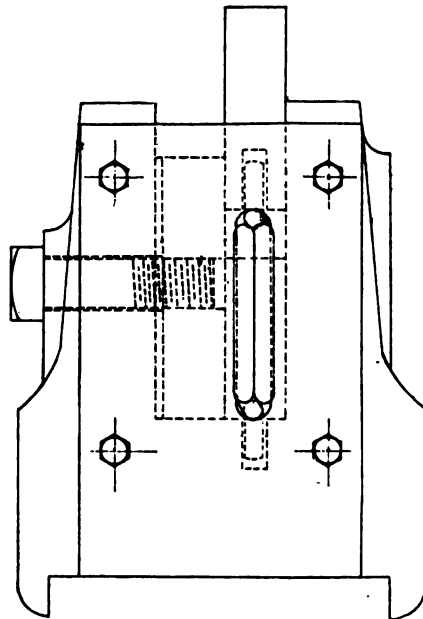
THE ASSEMBLED SHEAR. SIDE VIEW OF UPPER SKETCH IN FIG. 2.
